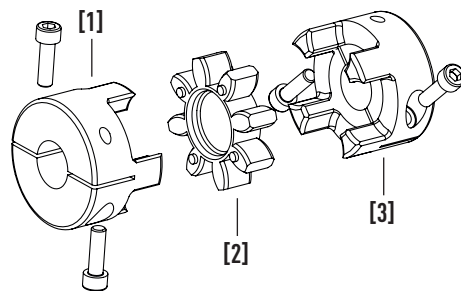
Coupling assembly variant 2: clamping hubs with two clamping screws
